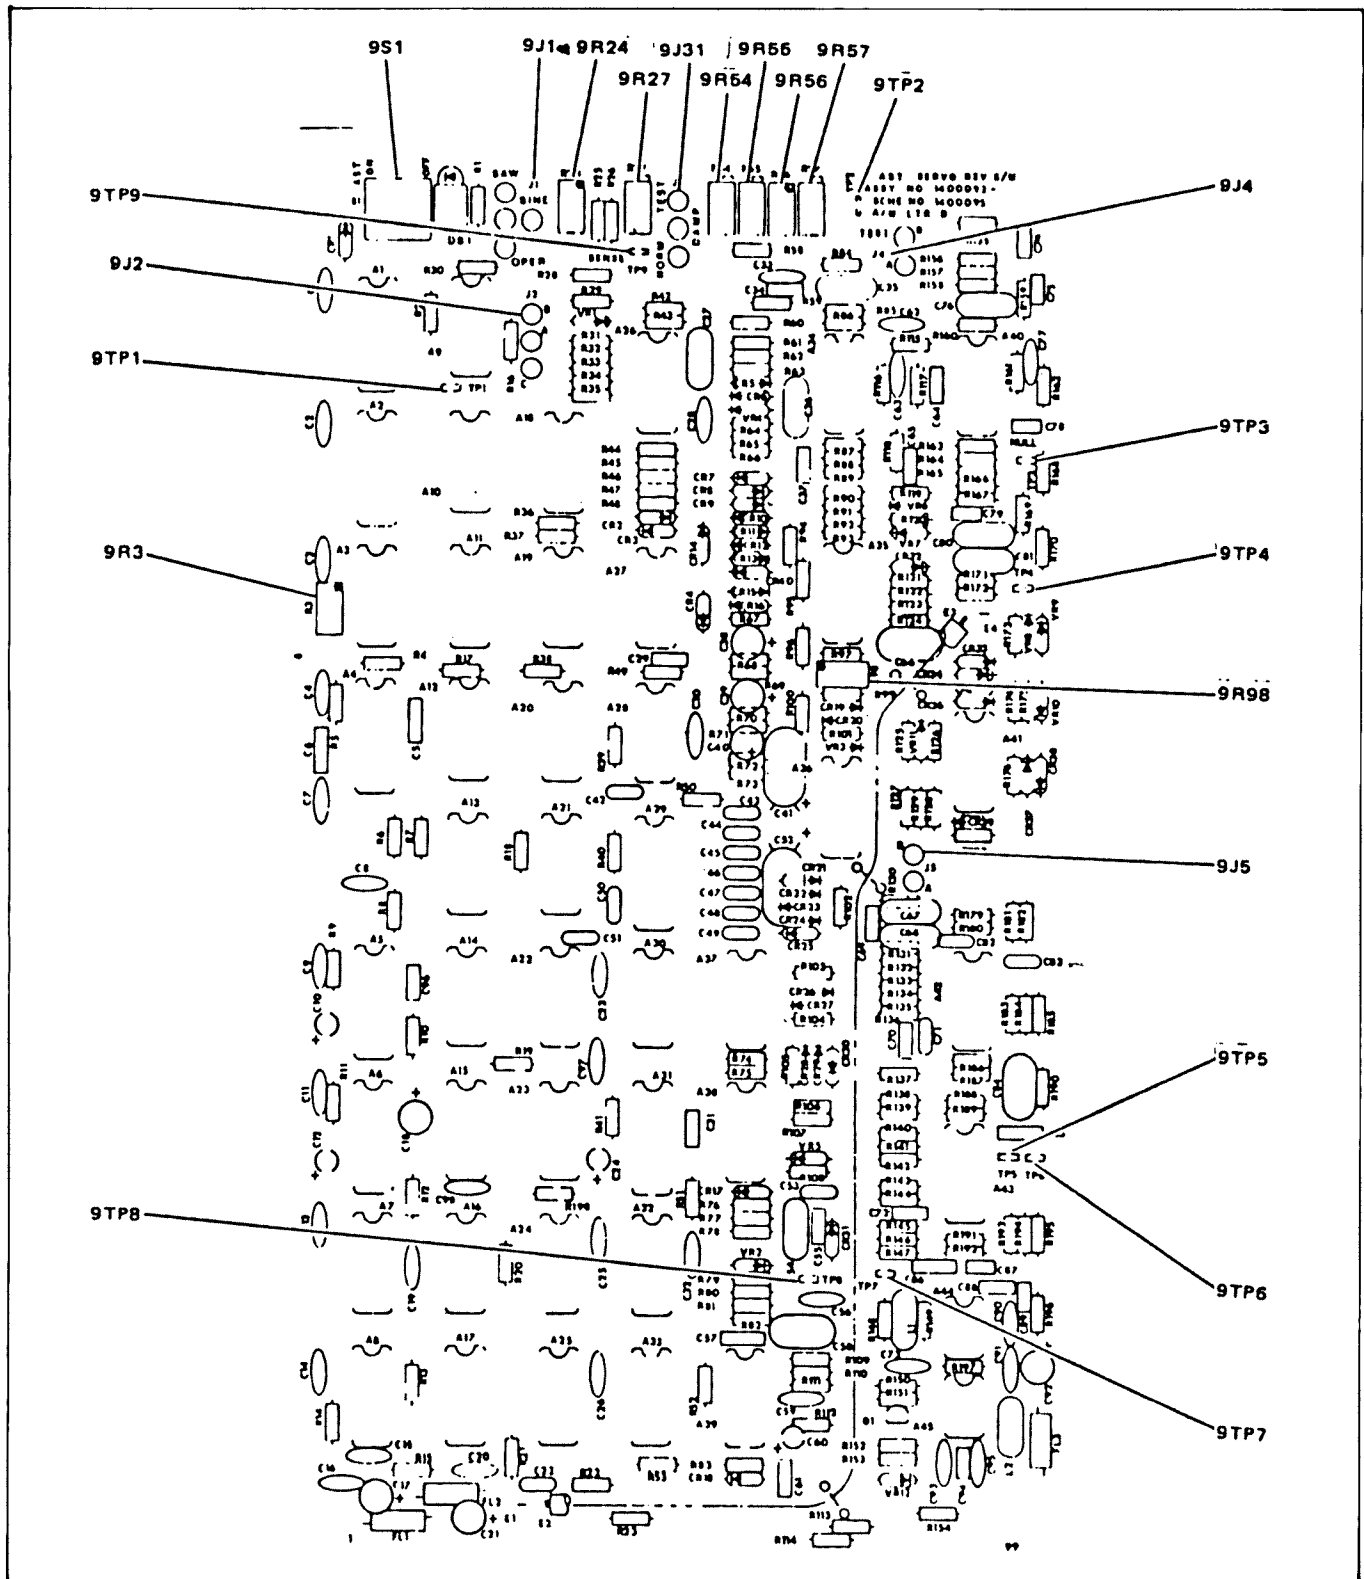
AST Servo PWA 9, Assembly No. 1400093 (Accessory)
